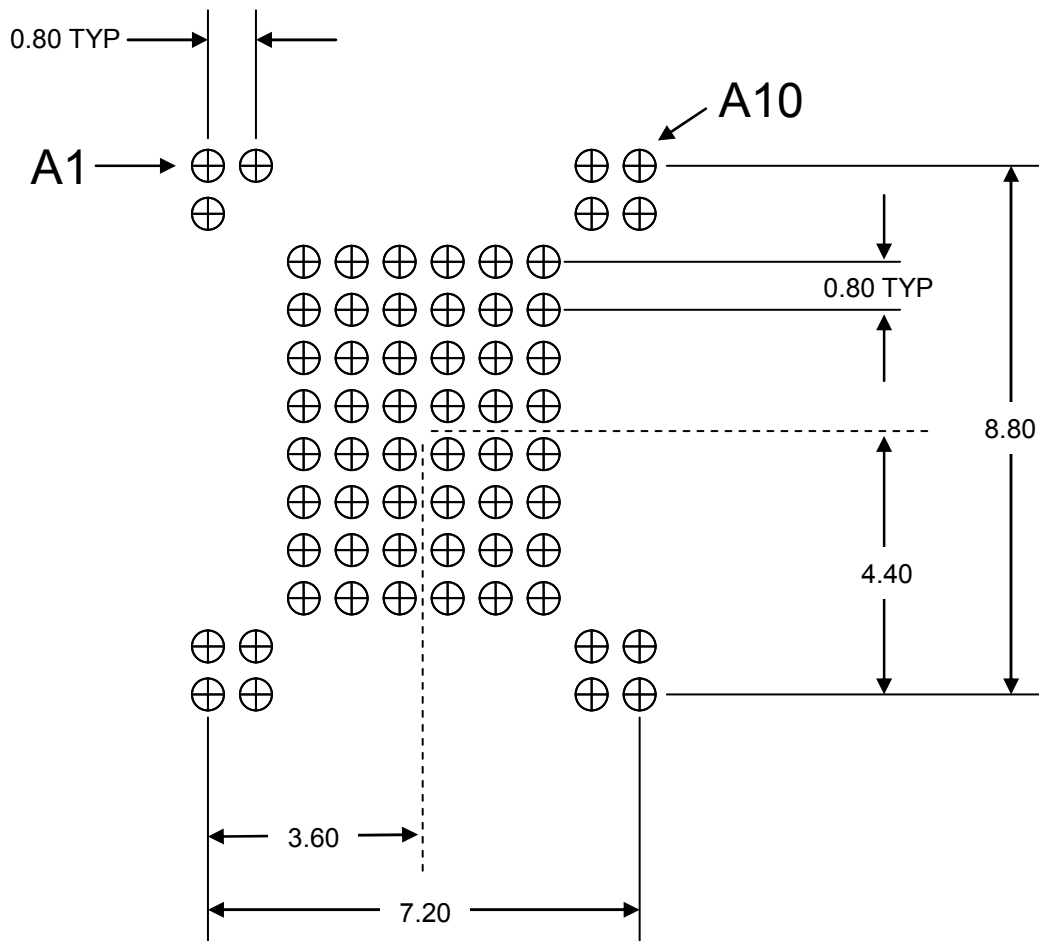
BGA ball spacing requirements (top view, dimensions in millimeters)
